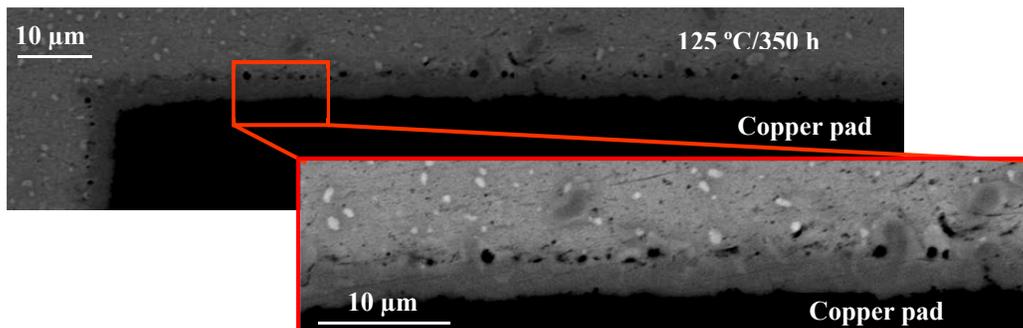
Champagne voiding in SAC solder assembled with ImAg board finish
